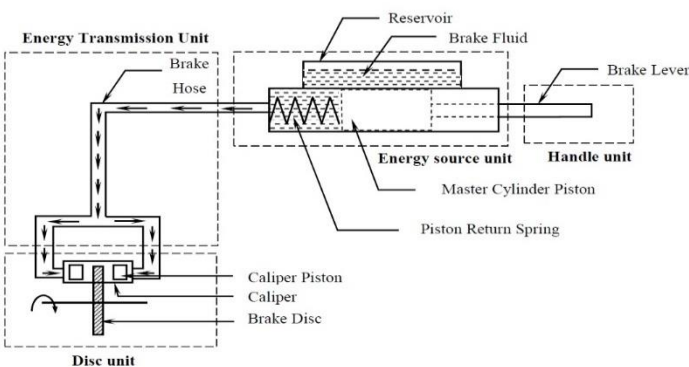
Outline of a hydraulic front brake system employed in motorcycle
